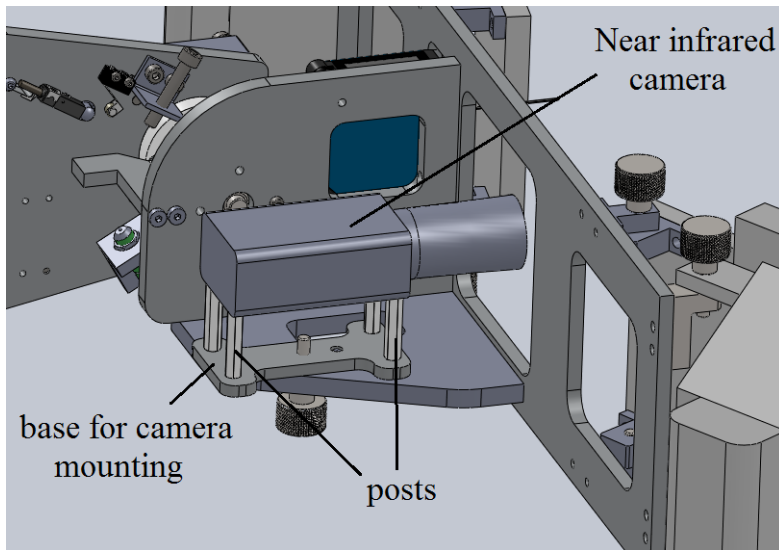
Mounting fixture on a robotic scanner for NIR camera
